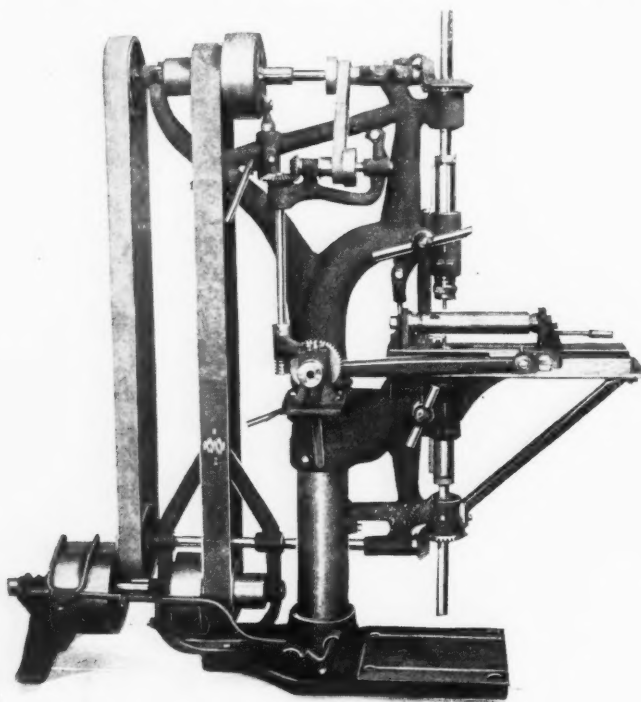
Routing Machine for Key-slots, showing Table Reciprocating Mechanism.
